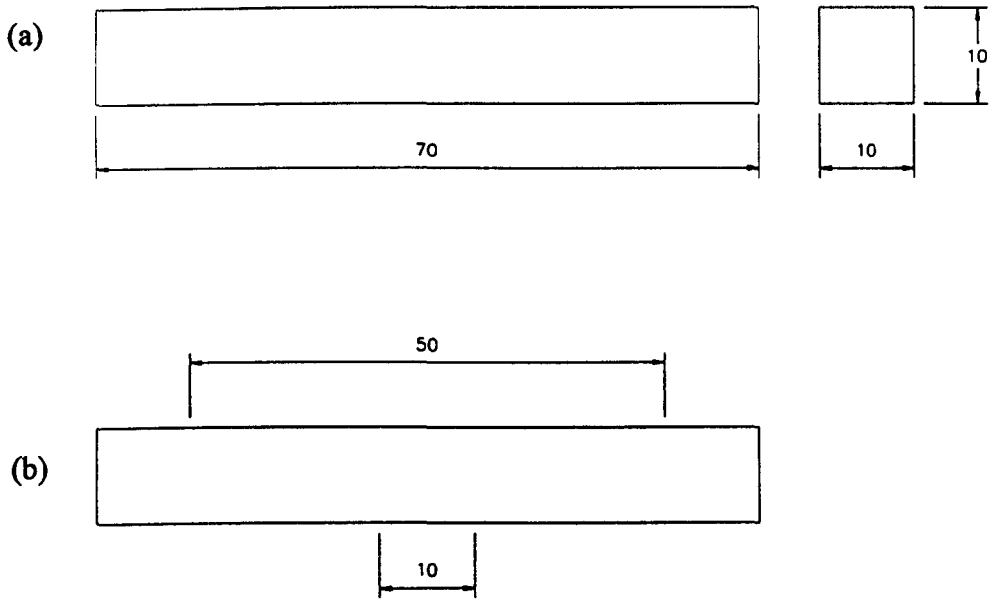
Four-point-bend fatigue specimens with (a) dimensions, and (b) loading points.
